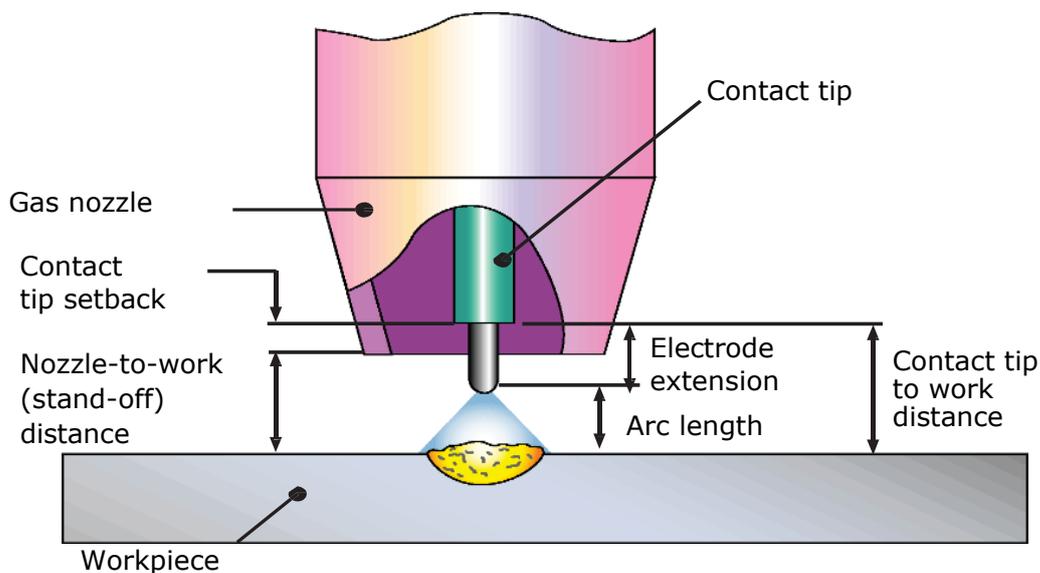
Contact tip to workpiece distance; electrode extension and nozzle to workpiece distance. Source: TWI
